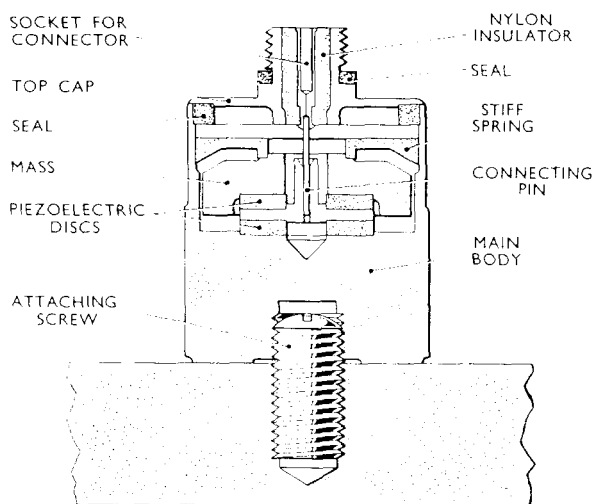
(b)—SECTION THROUGH ACCELEROMETER
